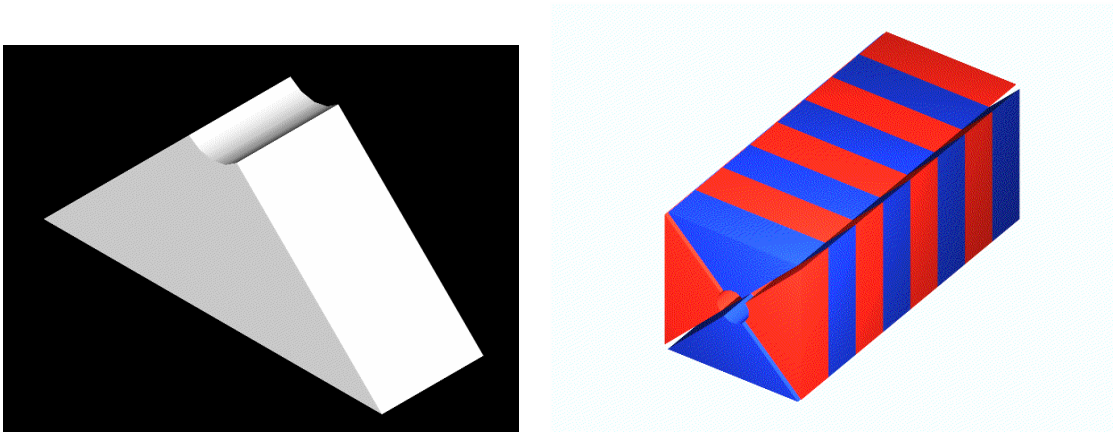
“Delta”-shaped PM block and two periods of undulator assembly. Different colors in assembly indicate magnetic blocks magnetized parallel and perpendicular to beam axis.
